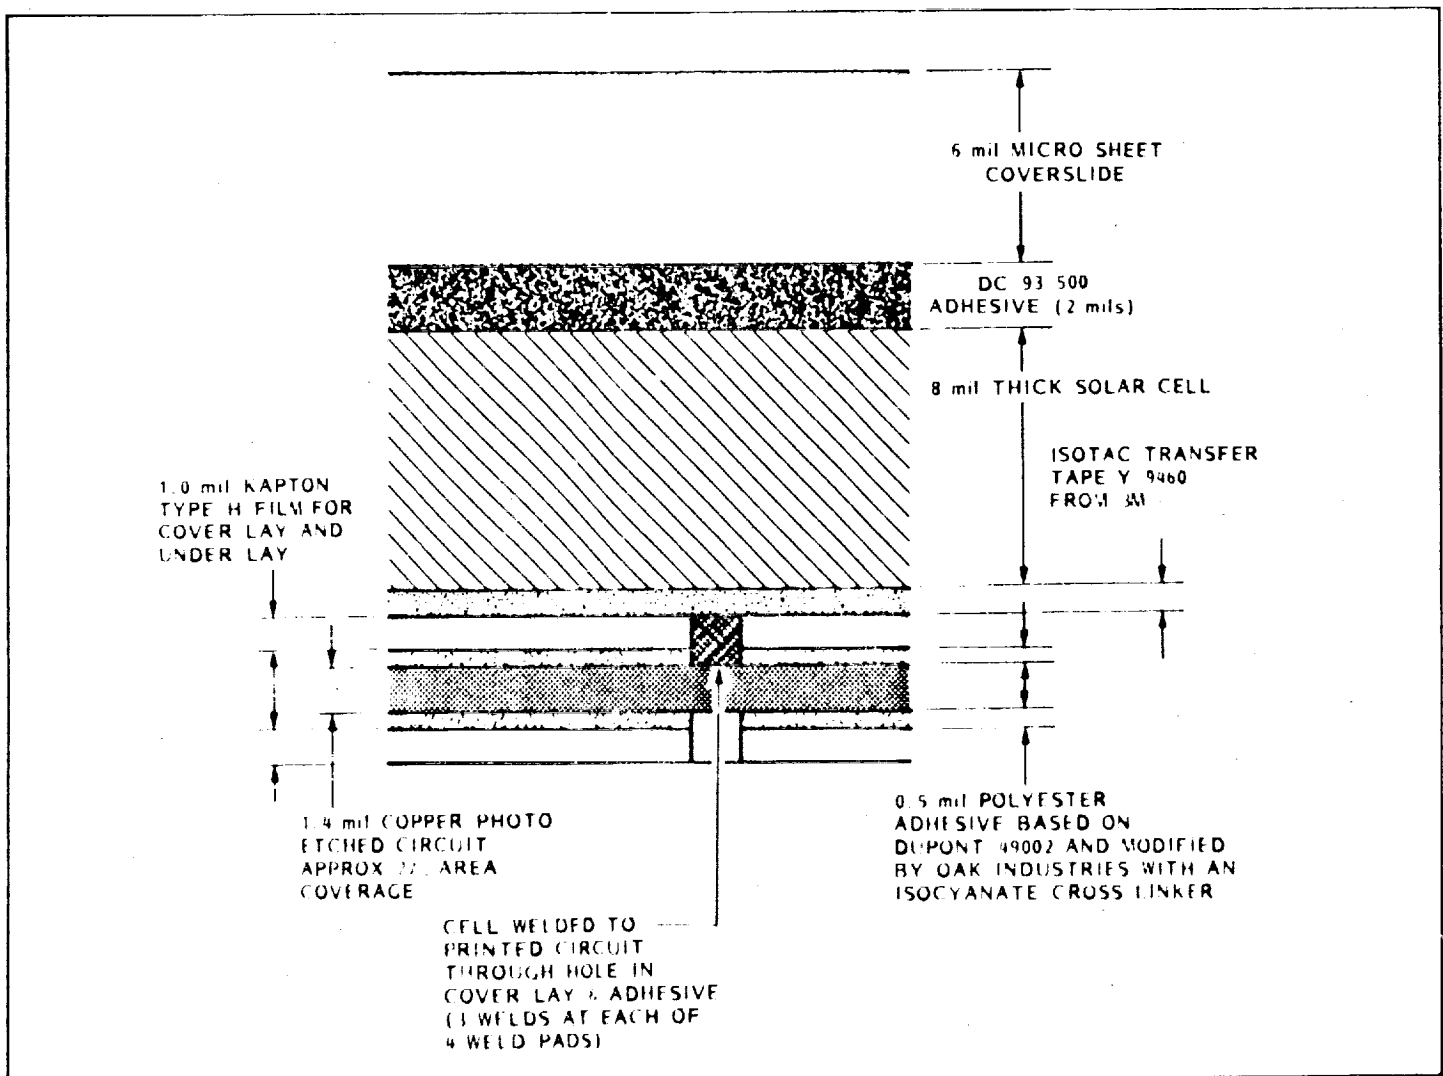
Cross Section of Solar Cell Attachment to Blanket
